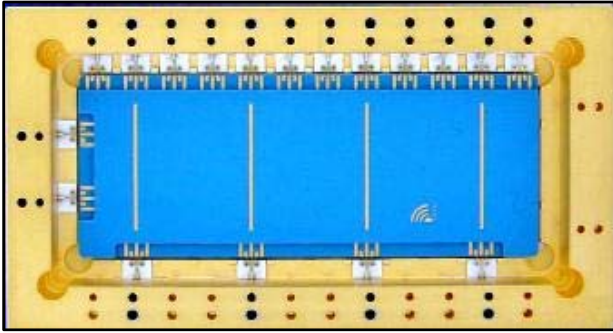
Photo of divider module utilizing multilayer LTCC in a gold-plated DISPAL housing.
